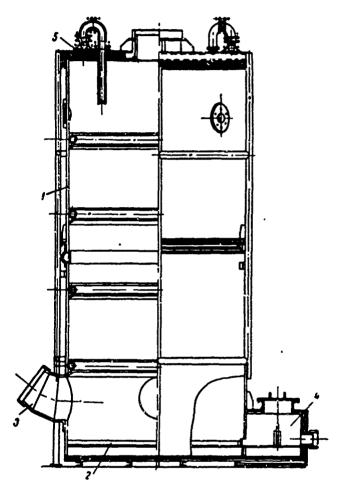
General view of a moistening tower from sheet vinyl. 1 - body of sheet vinyl tower thickness 5 mm; 2 - bottom of tower; 3 - gas entry; 4 - acid box; 5 - tower lid.
